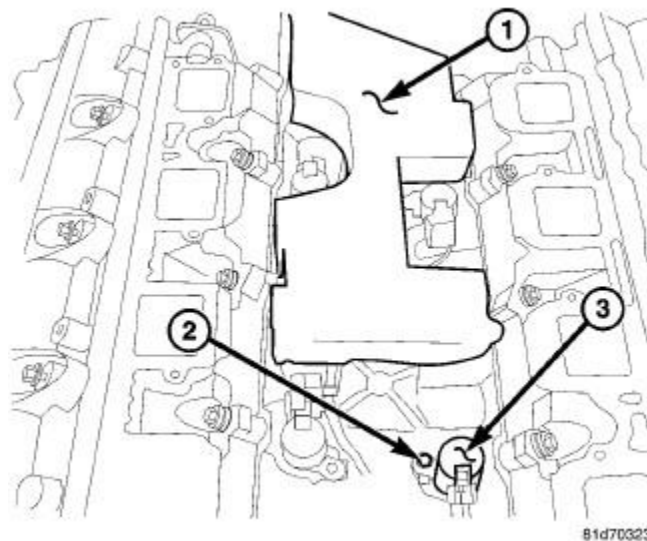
Intake Manifold Foam Insulator Pad, MDS Solenoids & Bolts
